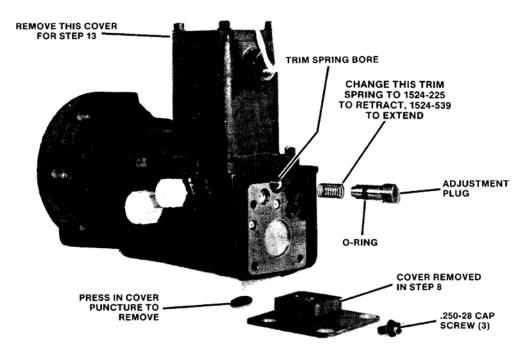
Actuator Body with Adjustment Plug and Trim Spring Removed
